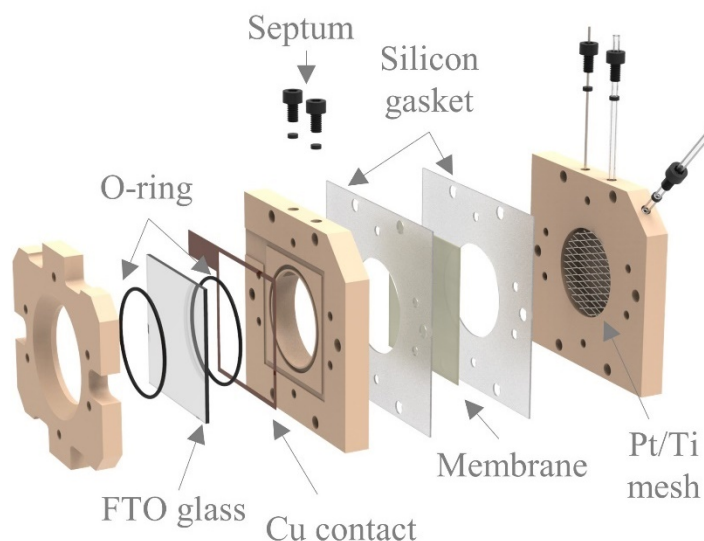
3D exploded view of the custom-made two compartments cell.
